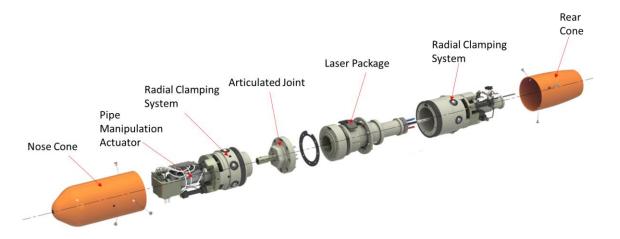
Exploded view of the in-bore laser tool design showing the constitutive functional components.
